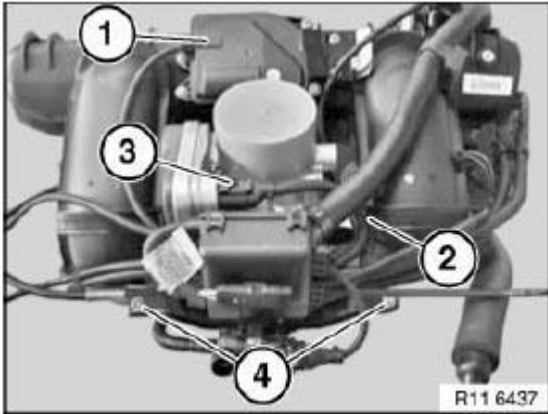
Engine Wiring Harness, Screws And Plug Connections
